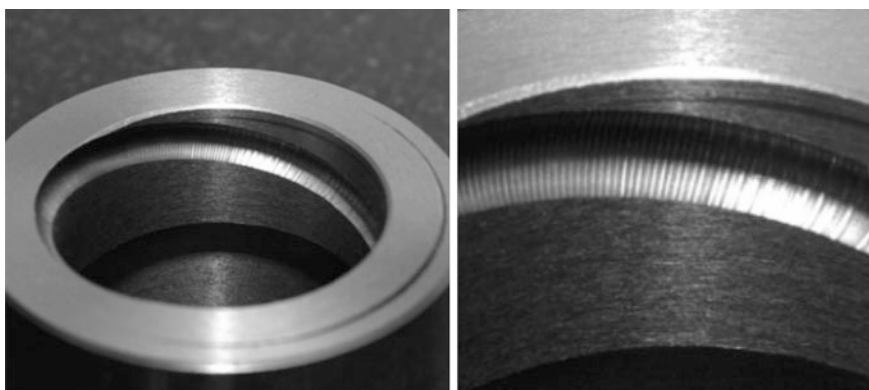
Marks of vibrations on the surface machined with the profiled tool
